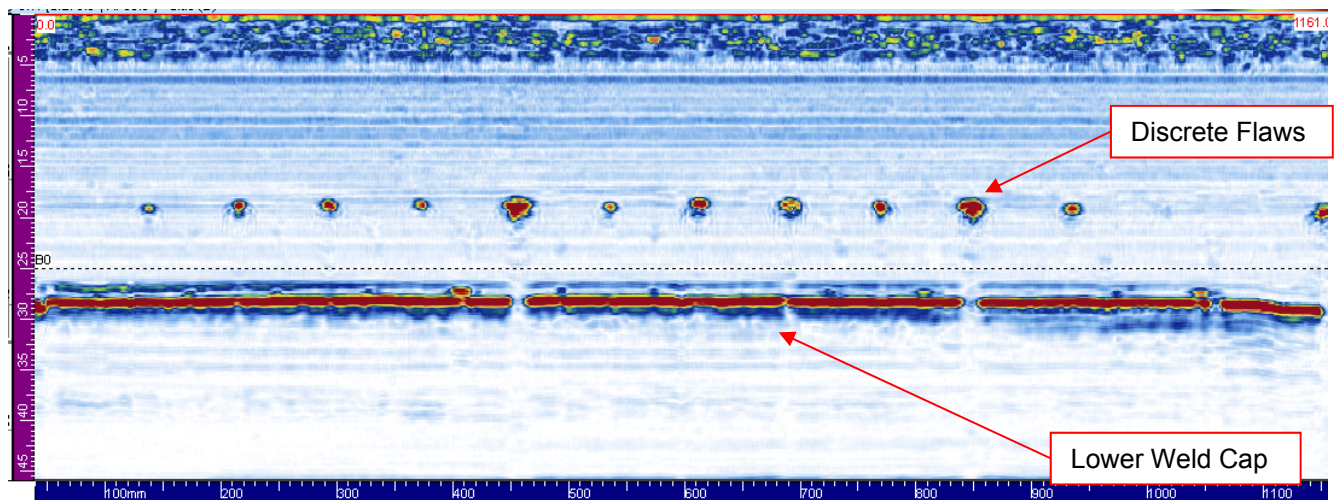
Typical scan of butt welded sample with discrete flaws.
